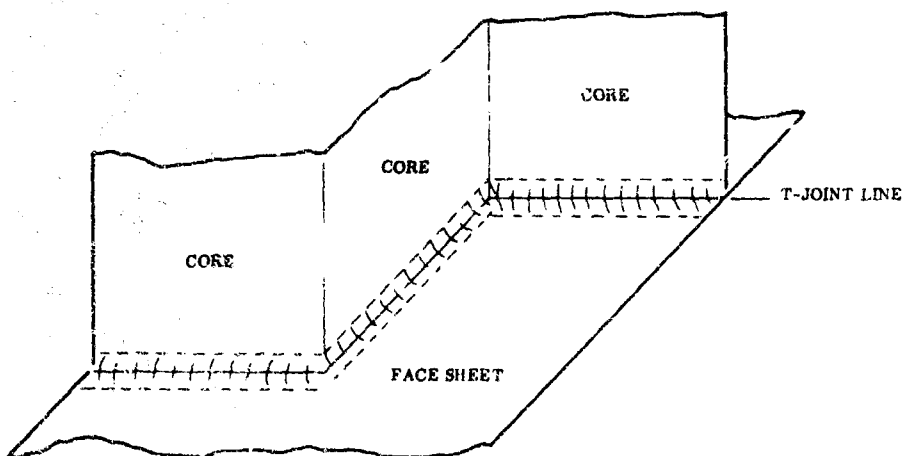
TYPICAL HONEYCOMB CORE-TO-FACE SHEET JOINTS
